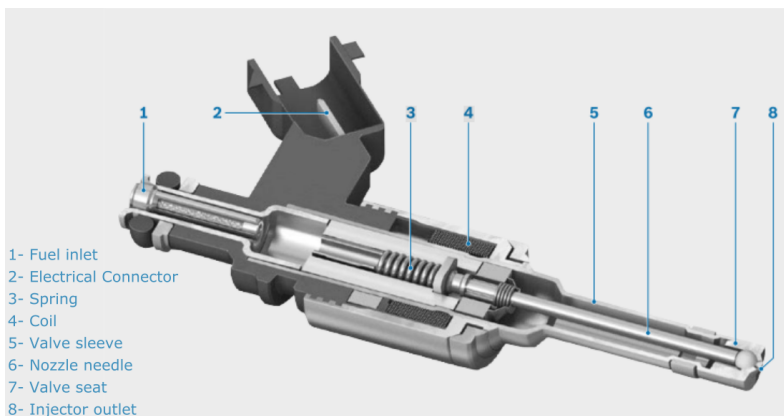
Parts of a solenoid-actuated multi-hole GDi injector. Adapted from [8].
